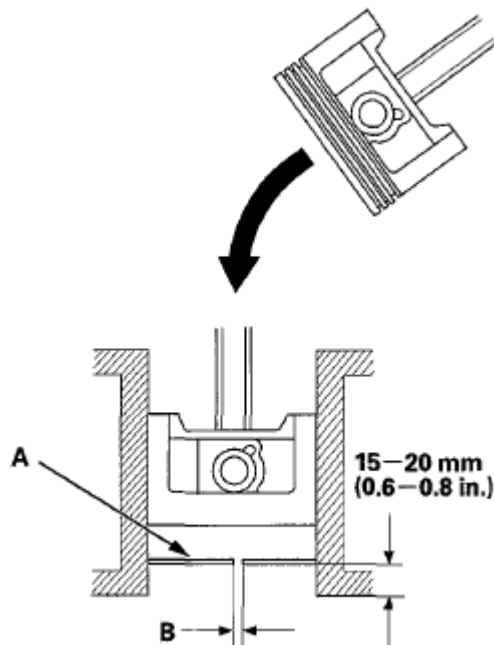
Pushing Ring Into Cylinder Bore From Bottom Using Piston
